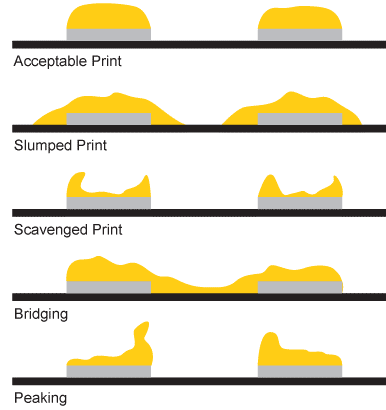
Possible defects that can be seen for the solder paste on the pads. [9]
